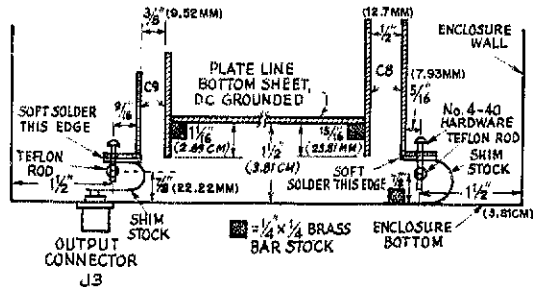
Relative positions and assembly information for the output coupling capacitor (C9) and the plate tuning (C8). Note that the shim stock is soldered to the movable vanes, and that the assembly is fastened to the Teflon shafts with No. 4 screws. The brass bar stock helps to provide a good ground connection between the shim stock of C8 and the chassis.
